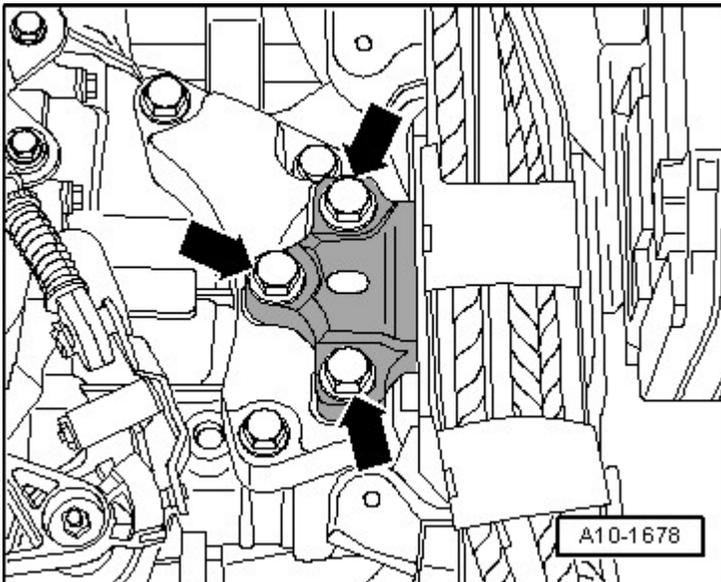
Identifying Bolts To Assembly Mounting On Transmission
